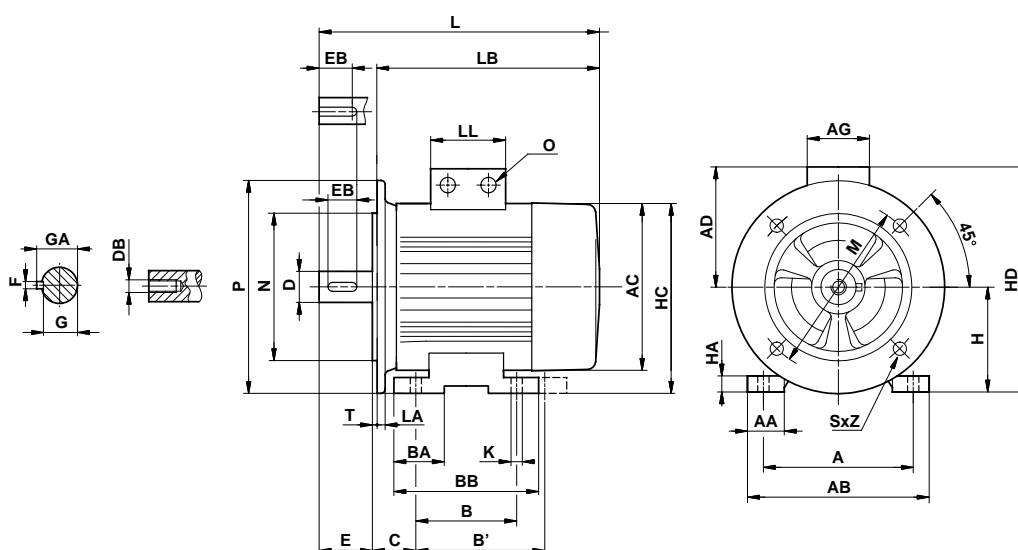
Foot-mounted motor with free-hole flange, IM B 35
